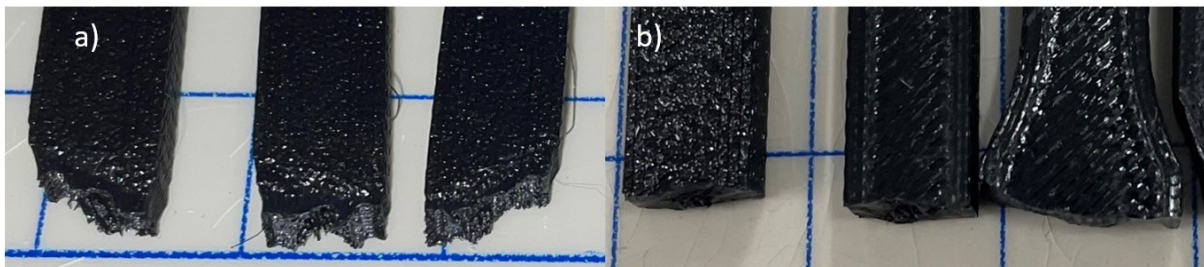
PETG horizontal build fracture surfaces. a) Non-irradiated, b) 2.25 MGy exposure
